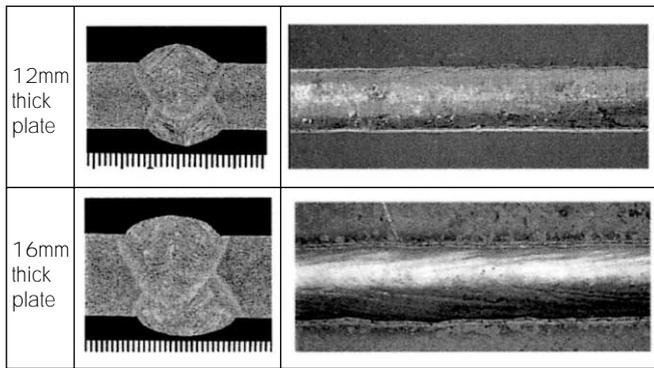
Joint penetration and bead appearance of AF-490/US-12K weld joints by single-pass-double-sided welding (700-750A/32-33V/40-80CPM)
